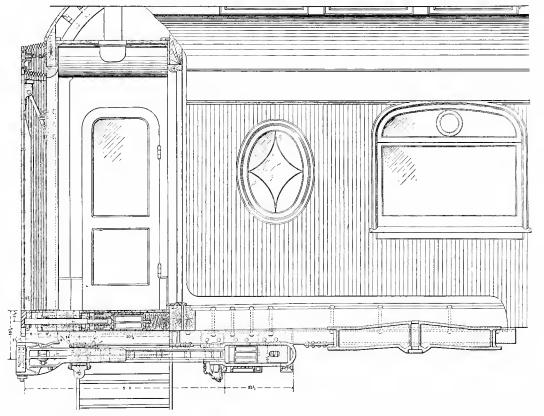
Longitudinal Section Through Gould Wide Vestibule Steel Platform with Friction Buffer and Draft Gear. Gould Coupler Company.
